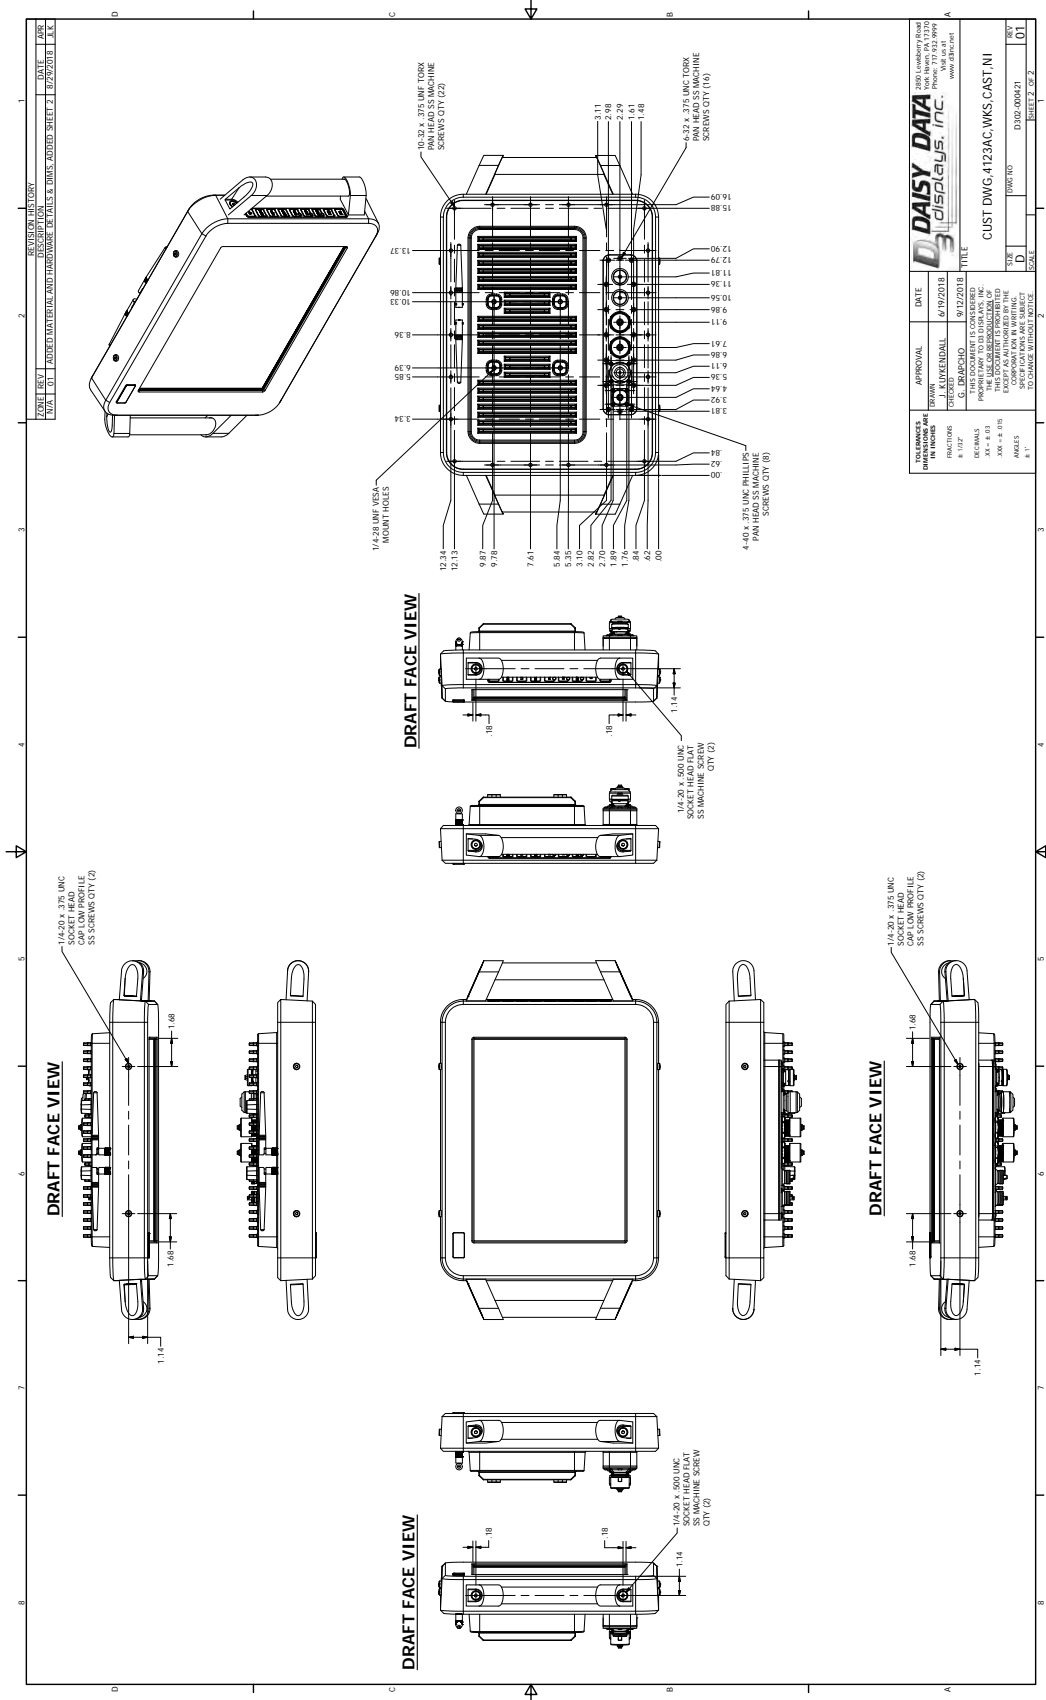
Model 4123AC Mechanical Drawing (2 of 2)
